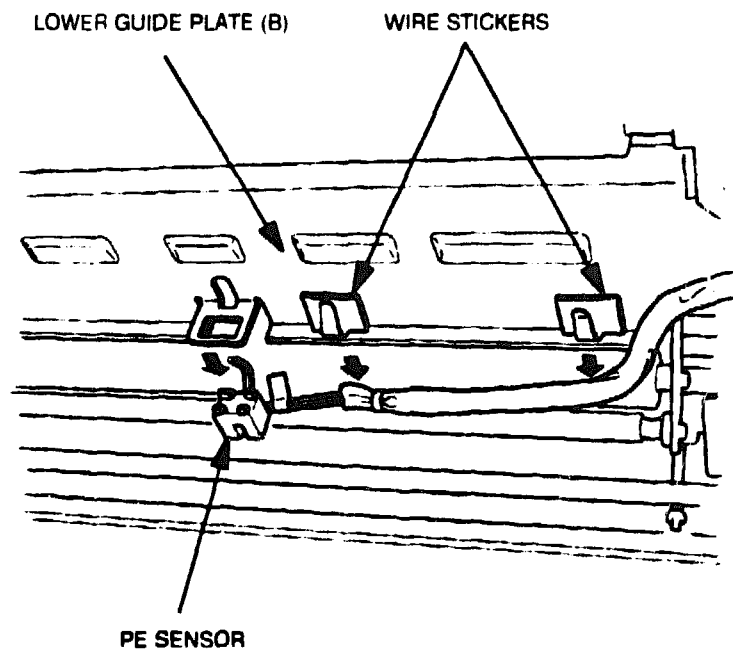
PE Sensor on Lower Guide Plate (B)
